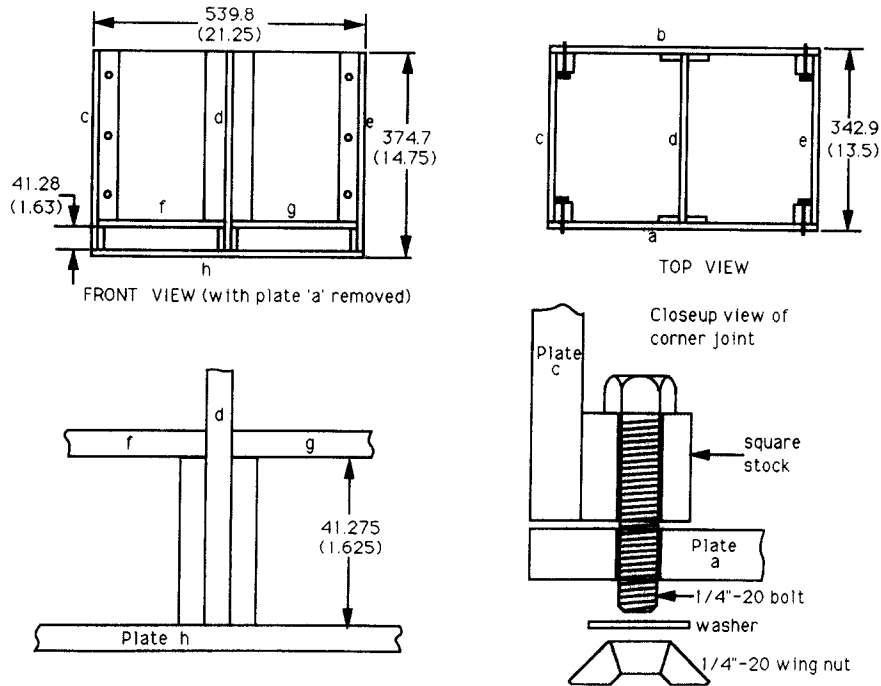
Assembly of the tandem cage (above), side view left, top view right. The detail (below left) is a close-up view of the joint between the bottom plate h, partition d, and the supports for the floor panels g and f. Detail (below, right) shows the joint between the acrylic stock glued to plates c and e and the panels a and b.
